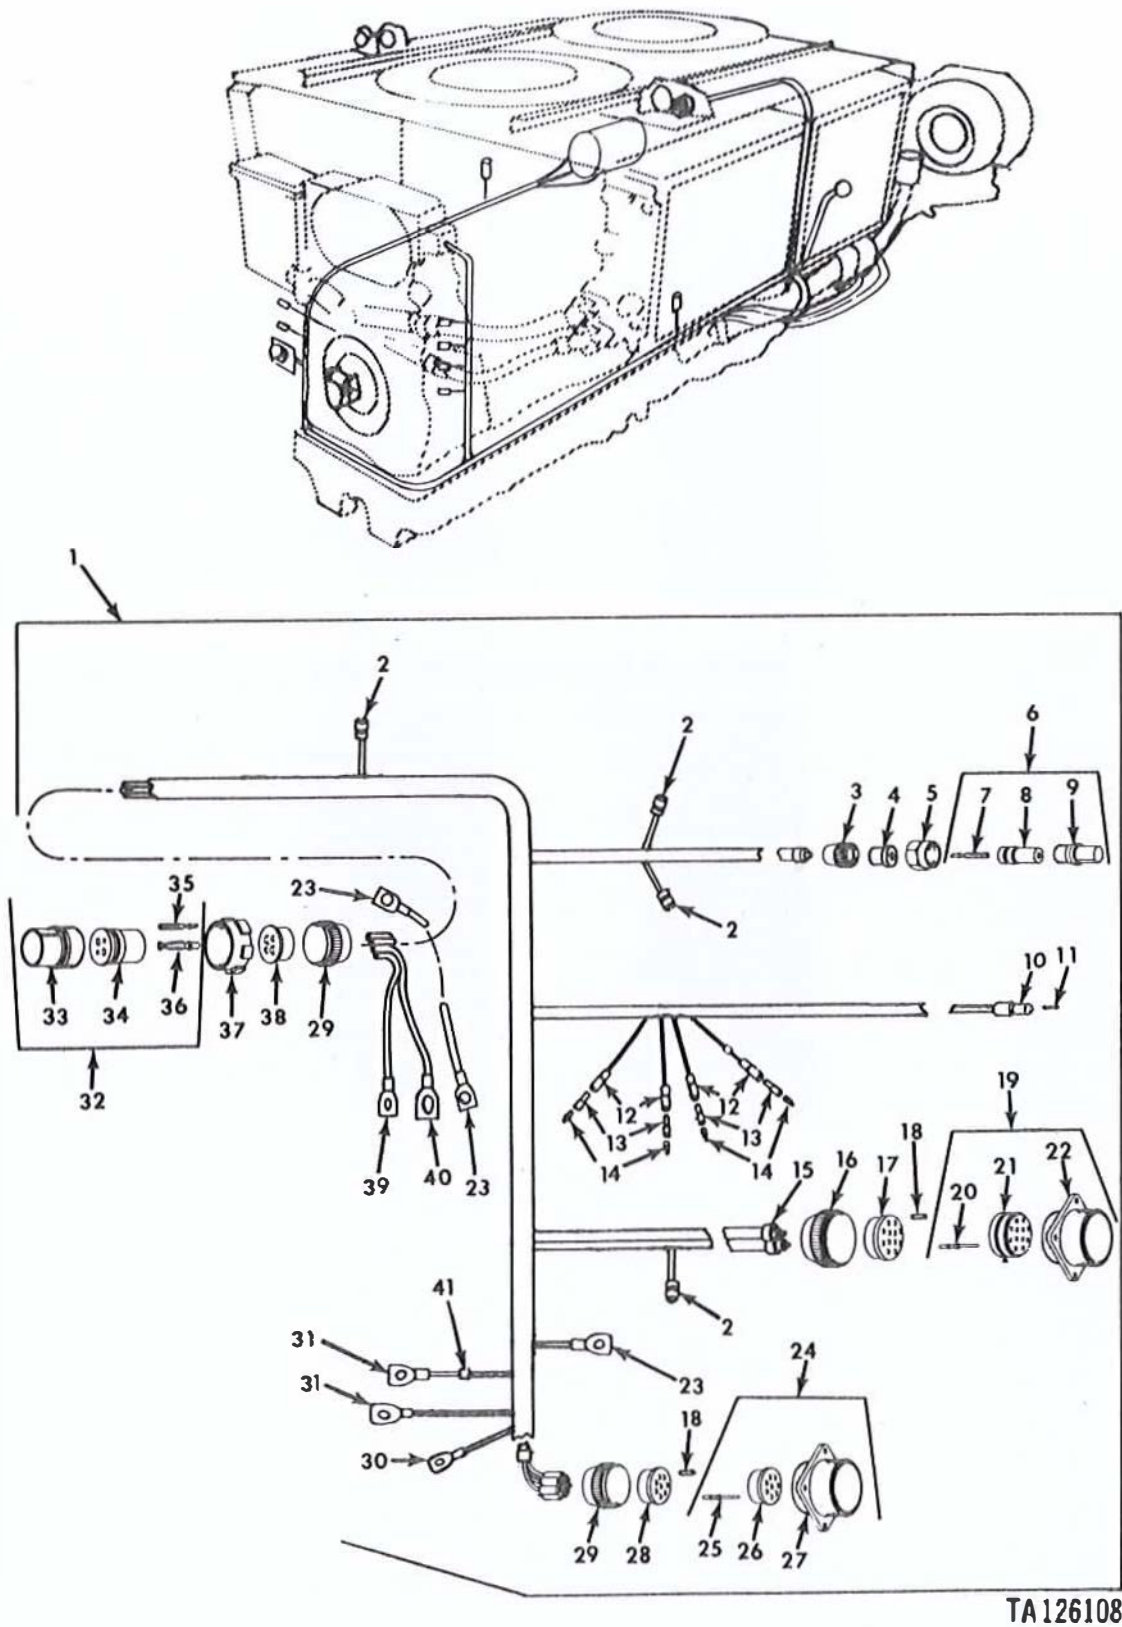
Engine wiring harness connector and terminals (AVDS-1790-2C engine) (Sheet 1 of 2).
